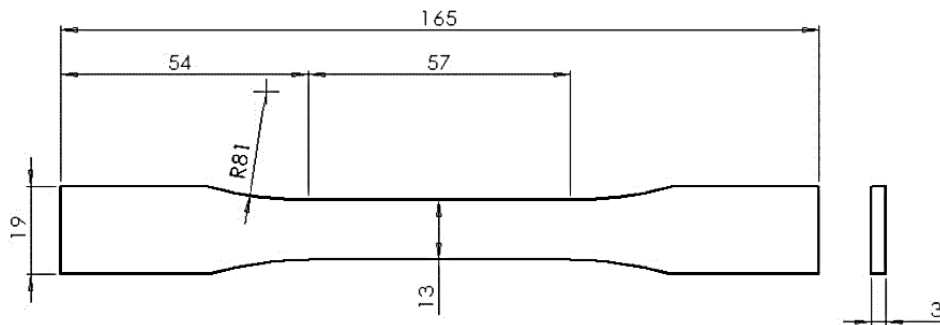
Type 1 specimen dimensions according with ASTM standard [41].
